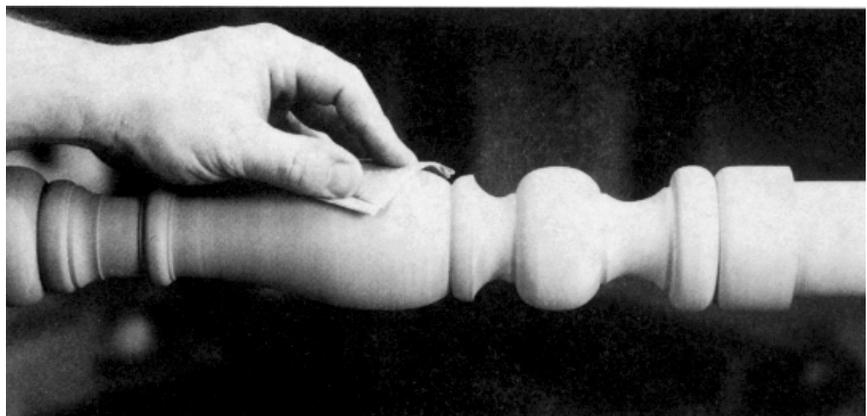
When you sand on the lathe, fold quarter sheets of sandpaper into thirds to protect your fingers from the heat build-up.
